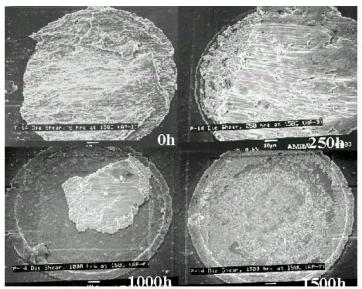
Die Shear Test showing the Fracture Surface of Eutectic SnPb Bumps through 1500 Hours of 150 °C HTS Test
